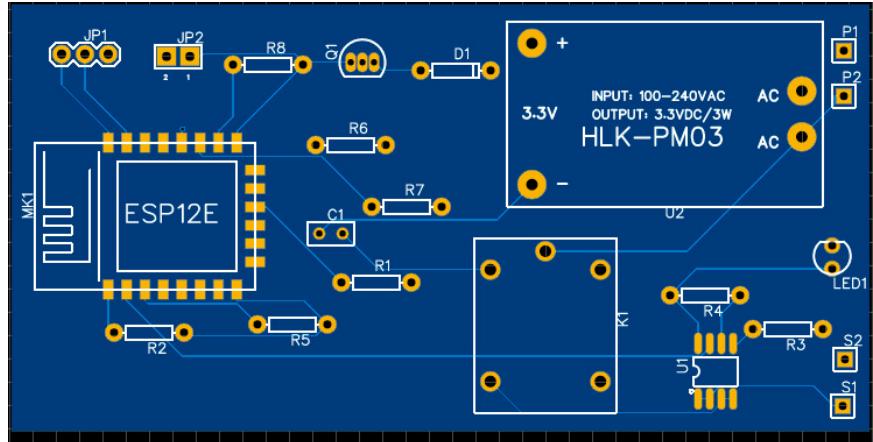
Top view of the printed circuit board for the IoT design. This board can be resized to fit small size containers.
